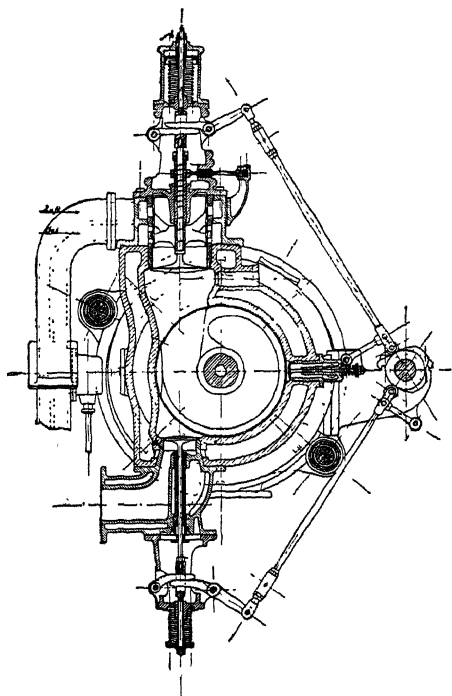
INLET AND OUTLET REGULATION OF THE DUISBURGER MASCHINENBAU-AKTIENGESSELLSCHAFT, FORMERLY BECHER & KEETMAN.
